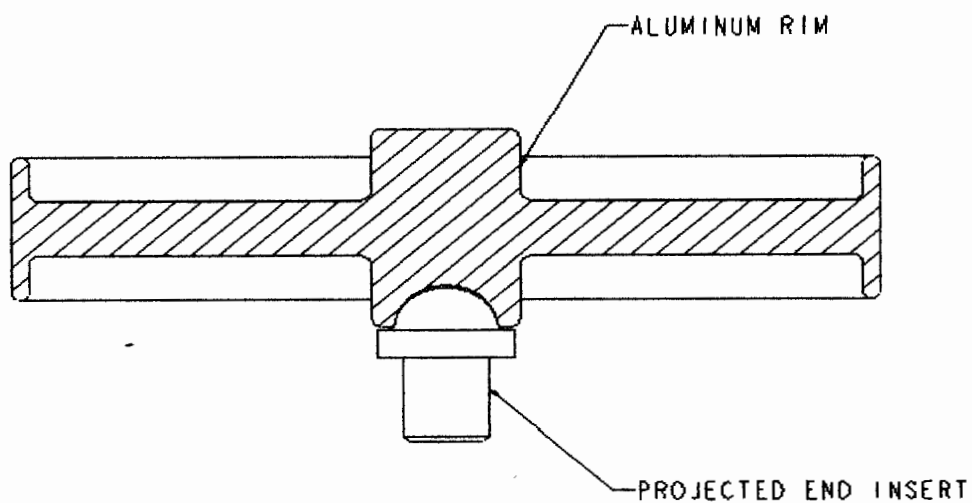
Projected-end insert used to draw heat out of one side of the hub.
